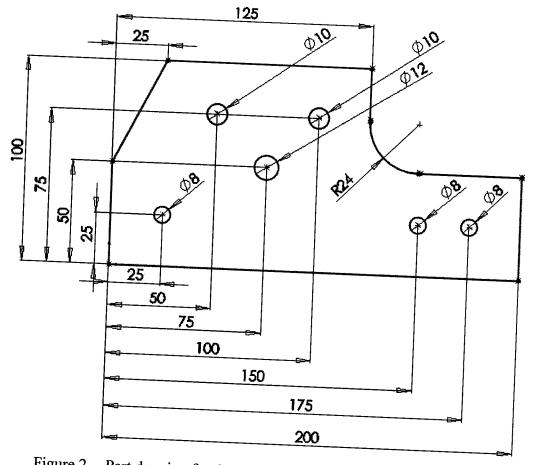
Part drawing for Question 7. Dimensions are in millimeters.
